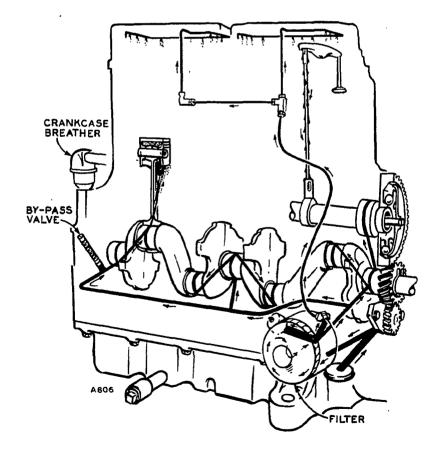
ENGINE PRESSURE LUBRICATION SYSTEM
